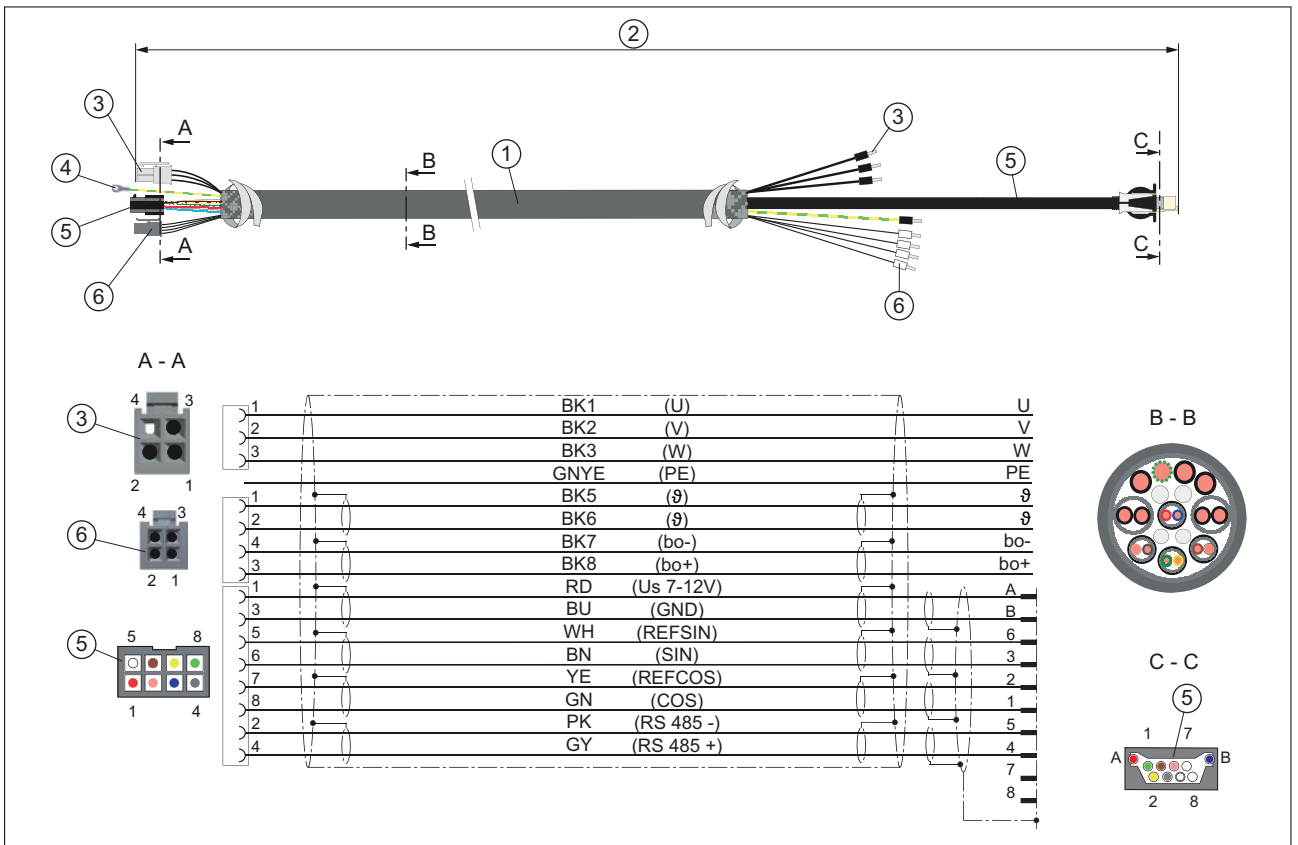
Motor encoder cable 1.5 mm² (PacDrive-3, LXM52/LXM32)
